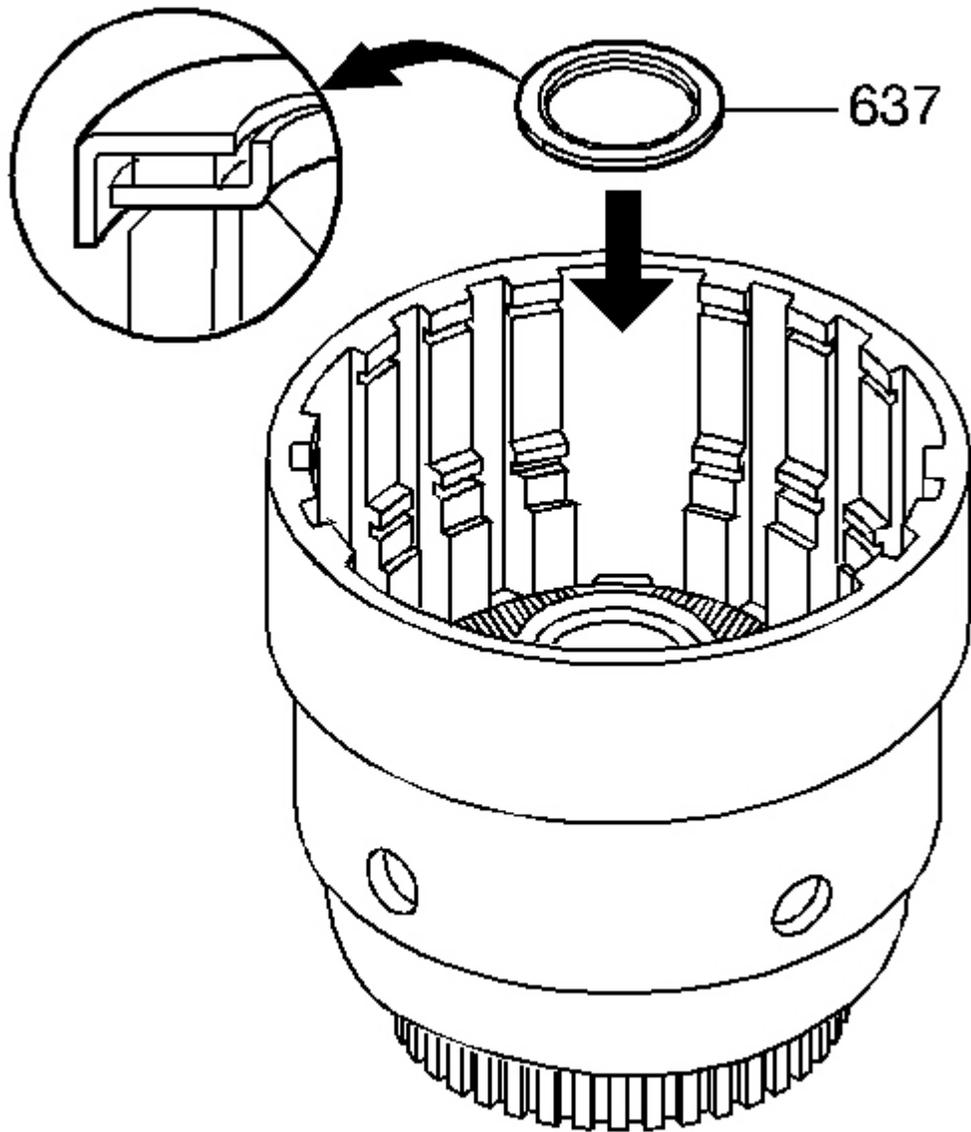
Input Sun Gear Bearing Assembly & Input Housing
